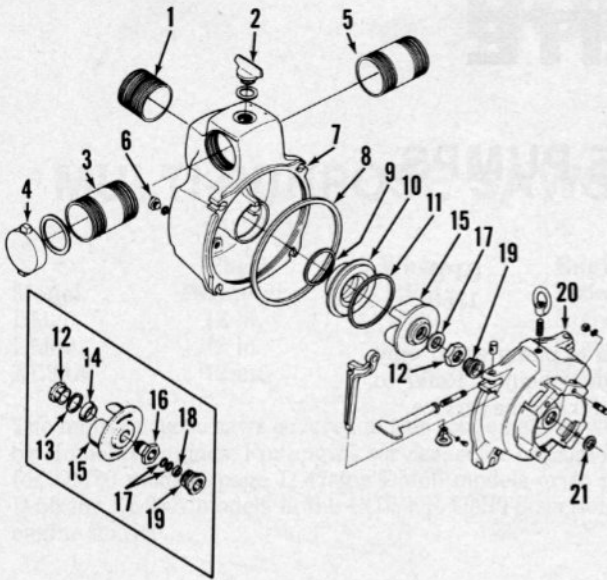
Exploded view of Model DTP4-1 trash pump. Models 160TP4-1, 160TP4-1A and 160TP4-1B are similar. Model 123TP4 is similar except for impeller assembly shown in inset.
